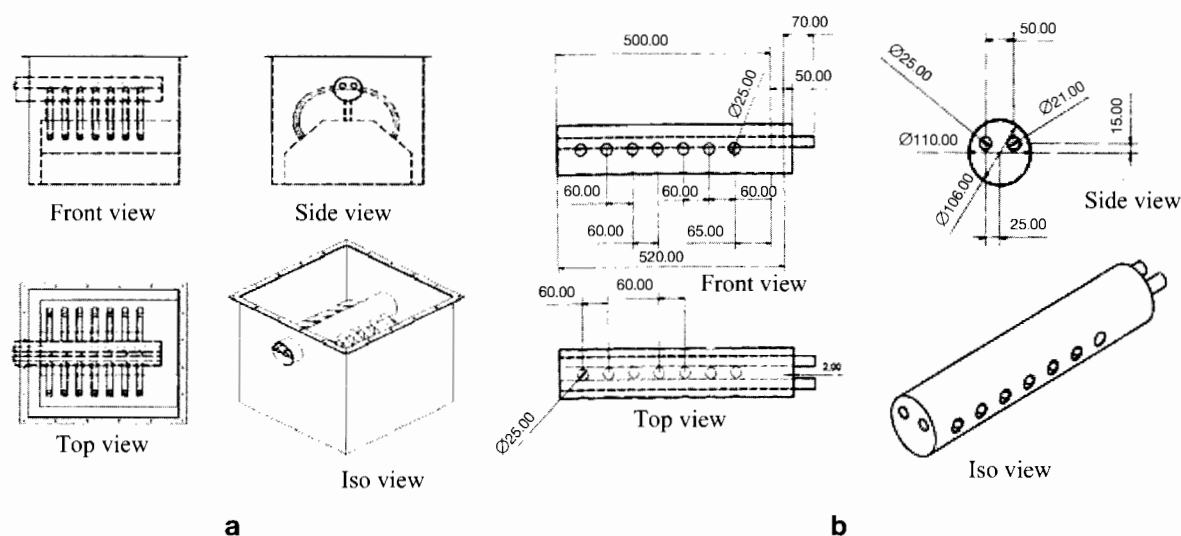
Production steam part: boiler water part (a) and smoke collecting chamber (b)
